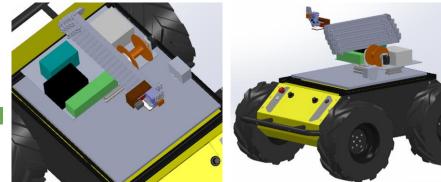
Complete System, Top View Figure 2. Complete System on UGV
